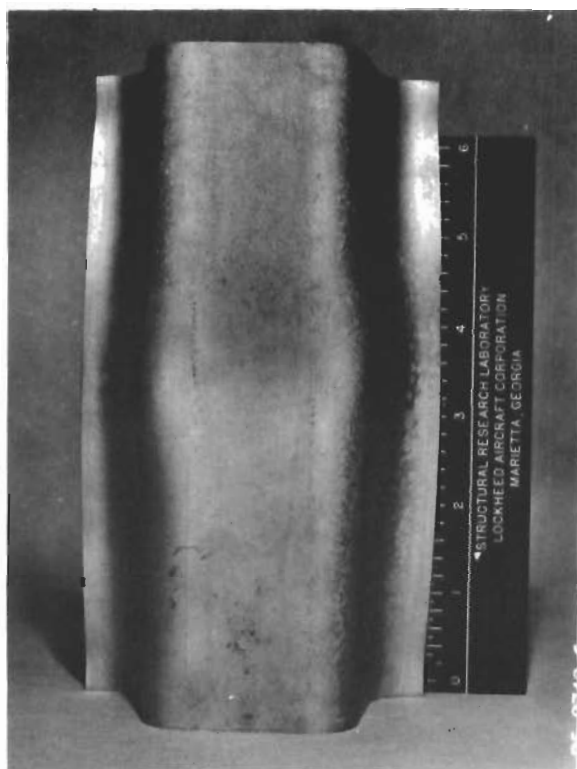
CRIPPLING SPECIMENS CAST IN CERROBEND FOR MACHINING
